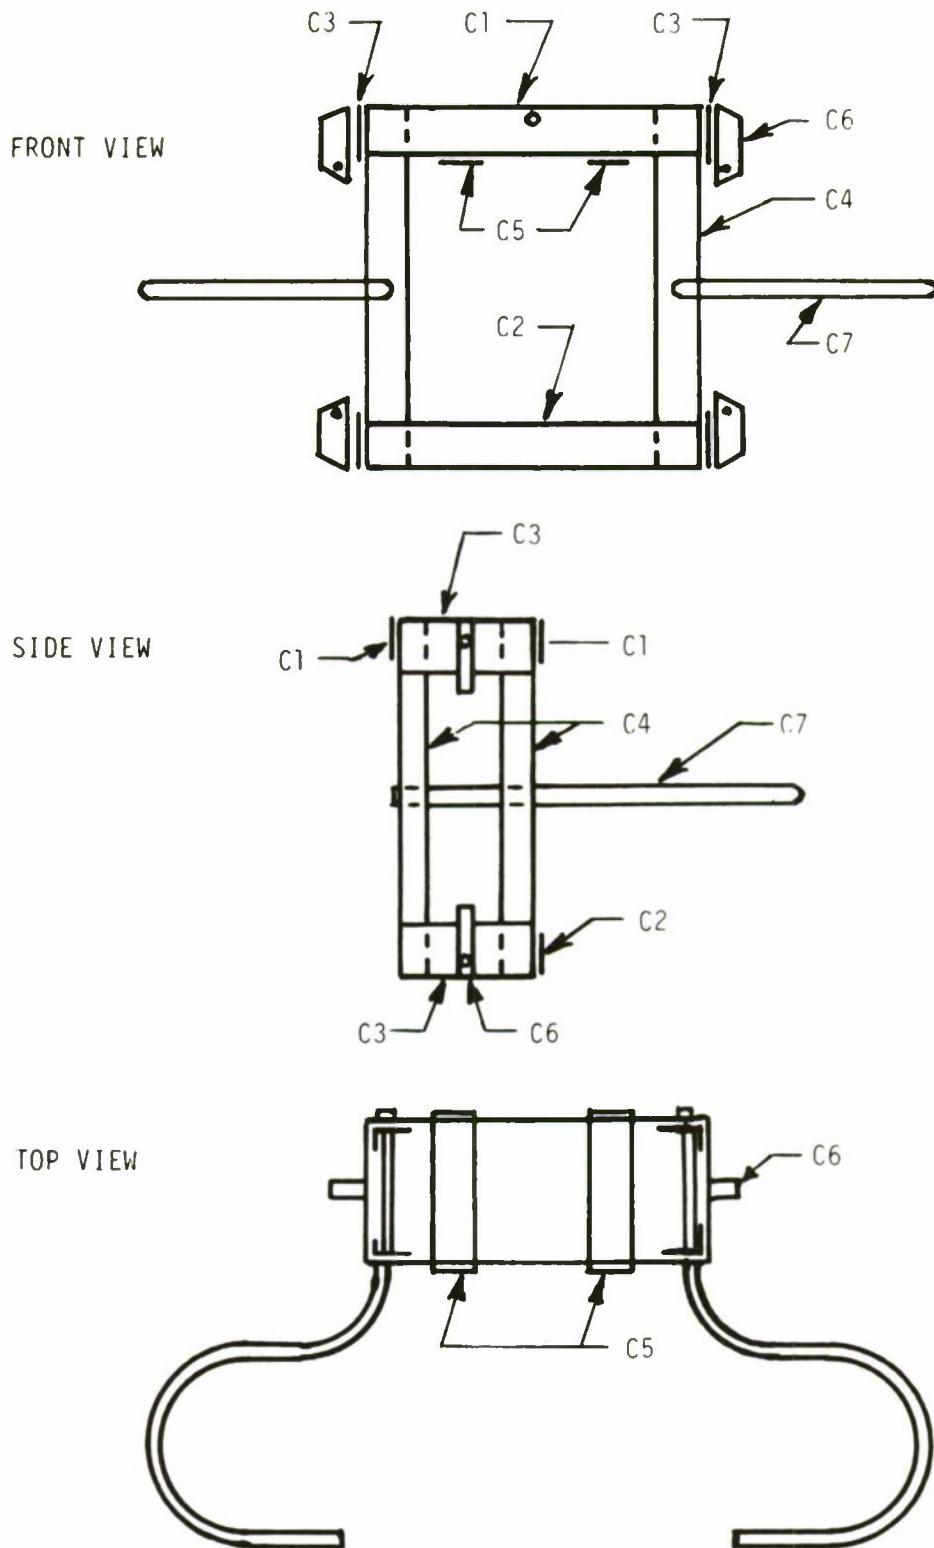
Welding of Carriage. Note: also consult the text for additional considerations.
